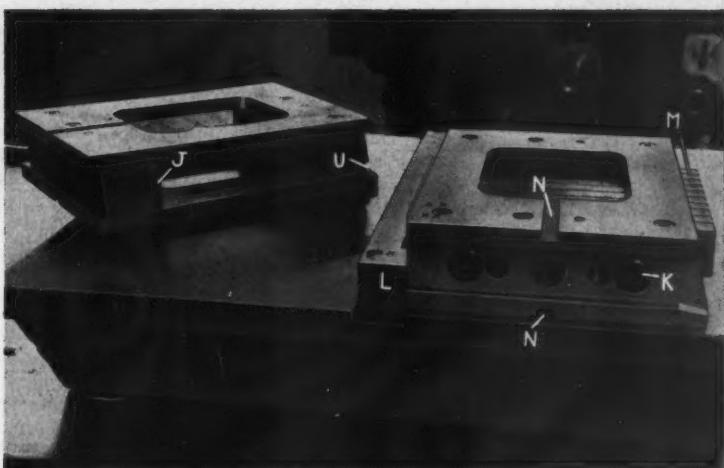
This vice-type fixture is employed for the second milling stage on knife blocks for the box-making machines built at the Crayford works of Vickers-Armstrongs (Engineers), Ltd.
